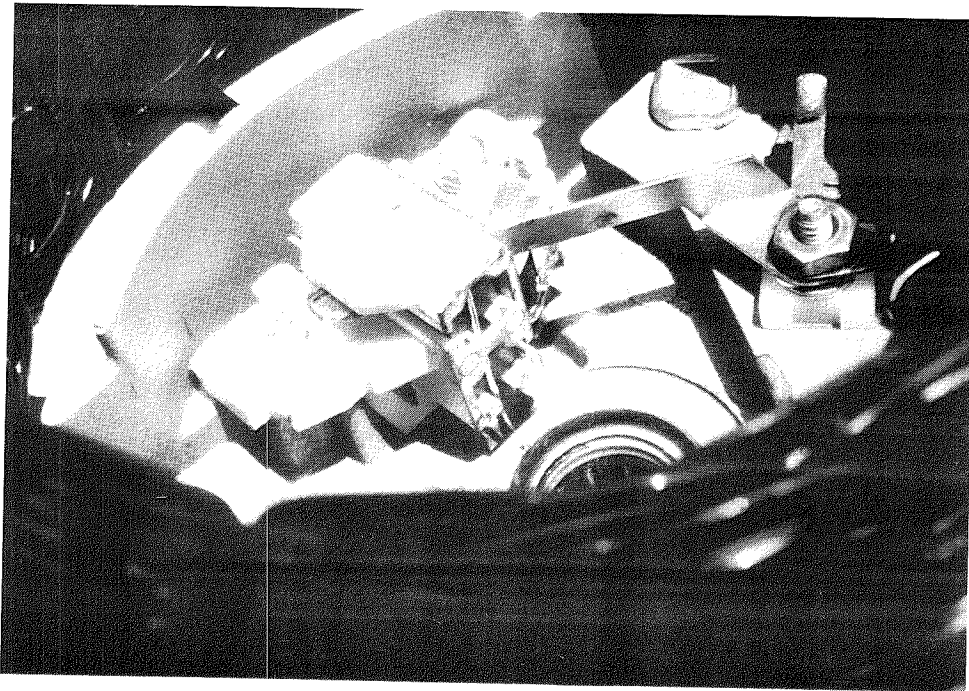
The two carbon brushes and their springs are held in place by a simple paper clip during reassembly.
